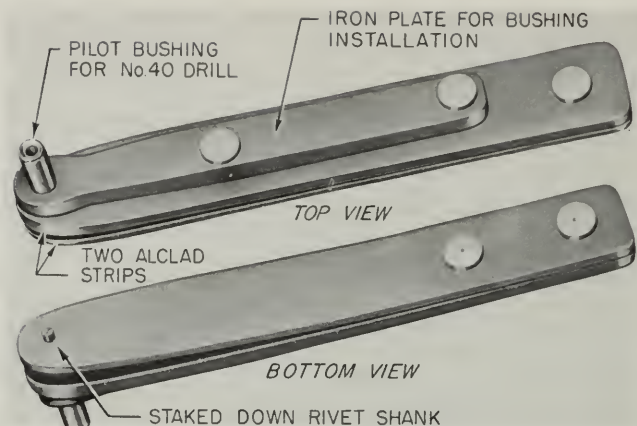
Blind Rivet Hole Locating Tool With Pilot Bushing
